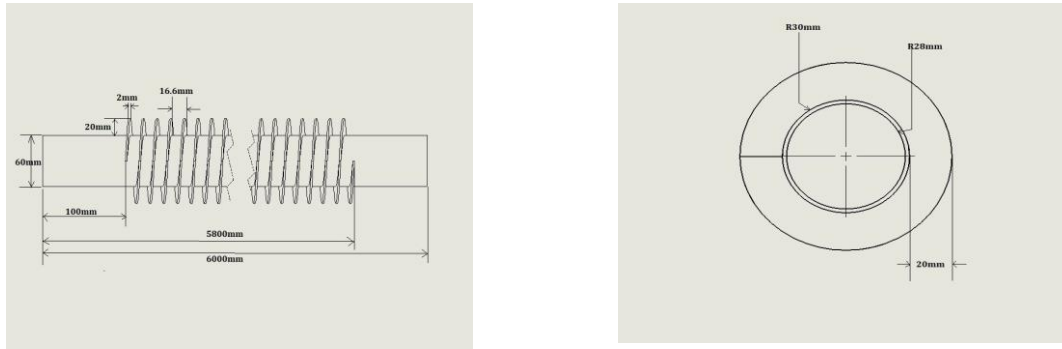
Side View and Front View of the ACC Pipe with Dimensions
